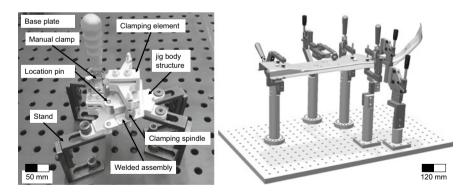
Small example welding jig (left) and larger welding jig (right)
